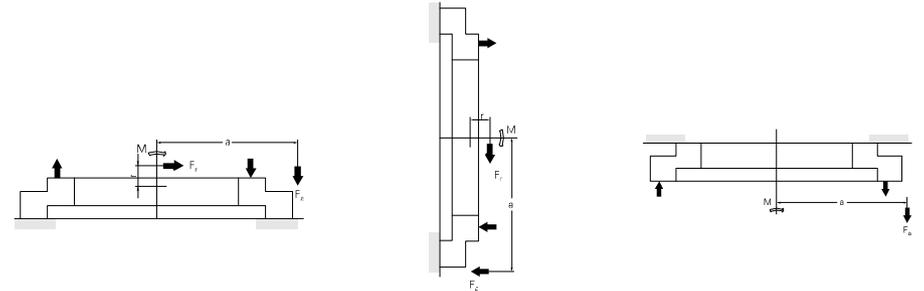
horizontal installation Figure 2 vertical installation Figure 3 hung installation
